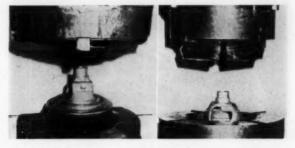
(Left) and Fig. 19 (Right)—Typical differential gear case dies.
